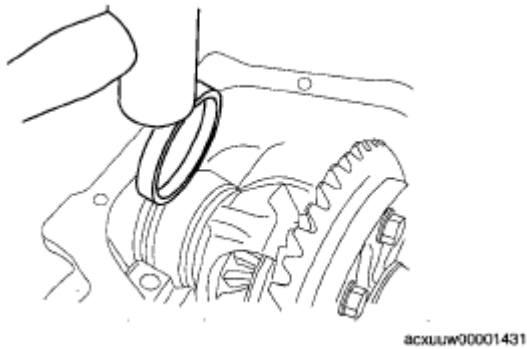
Tapping Adjusting Shim Between Spacer & Bearing Race
